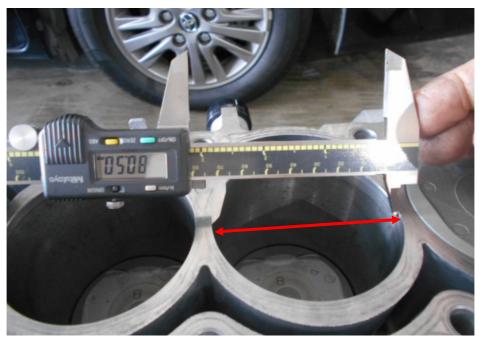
shows measurement being carried out to the bore (arrowed) of cylinder 1 of the Toyota engine. The bore measurement of cylinder 1 was recorded to be 80.50mm.
